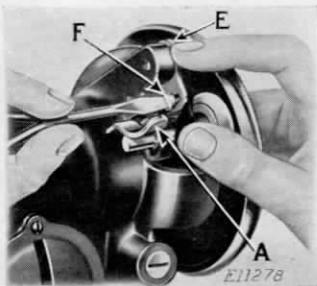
ADJUSTMENT OF BOBBIN WINDER
